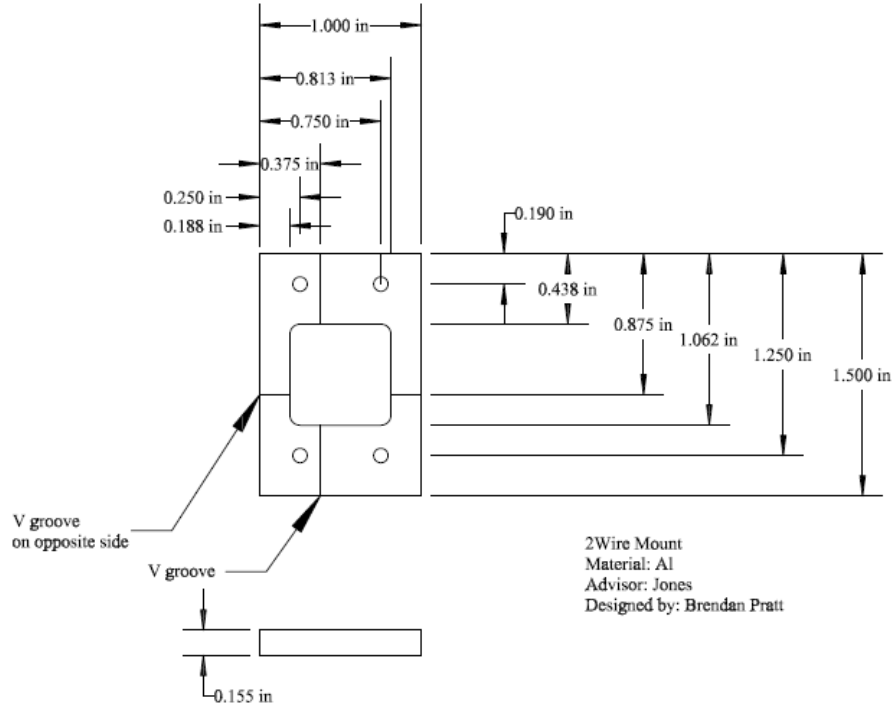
CAD rendering of mounting fixture used for measuring the focal spot in both x and y planes.
